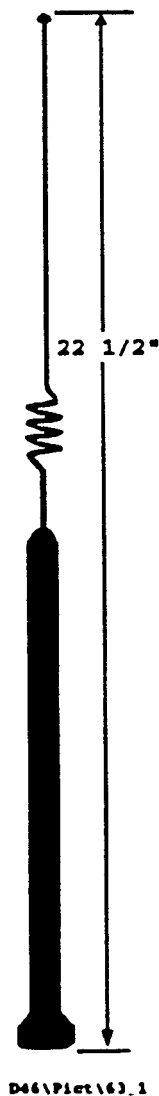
46-0063-001 Antenna dimensions (For Reference Only)
